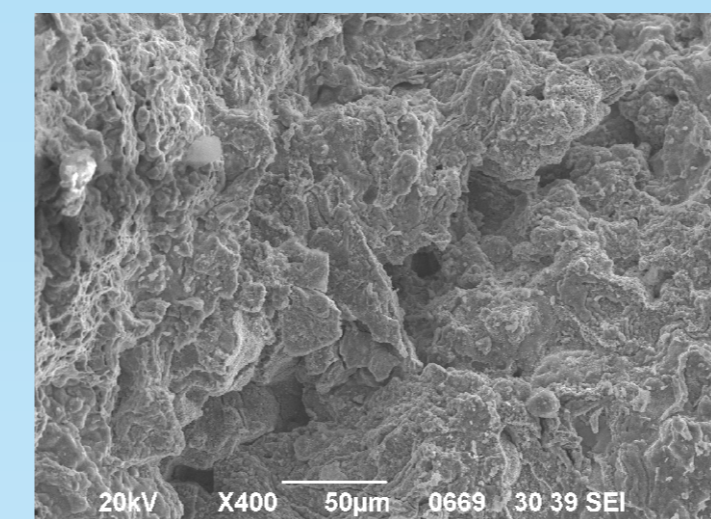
Fracture surface of C weld after test 625°C/50MPa/29,312hrs.
